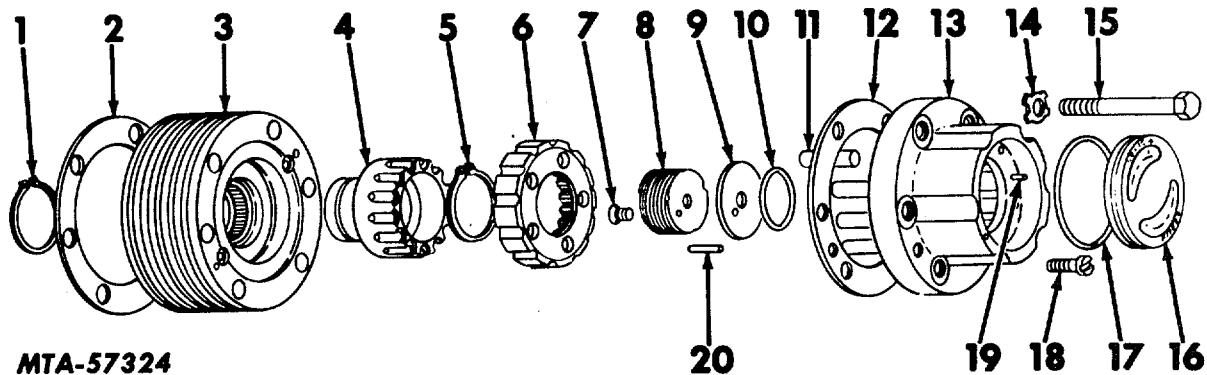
Locking Hub (Manual Type with Hex Head Mounting Bolts) (Exploded View)
